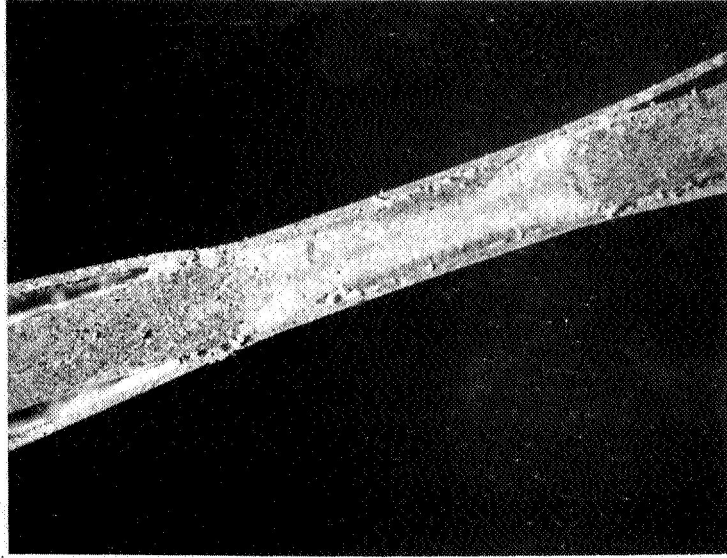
Three-Play Weld showing "Dog-Bone" Appearance
